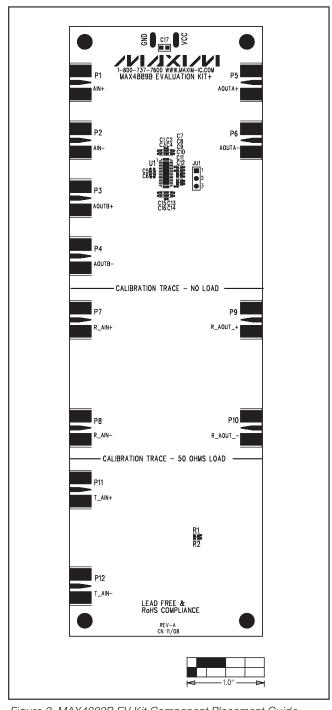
MAX4889B EV Kit Component Placement Guide—Component Side
